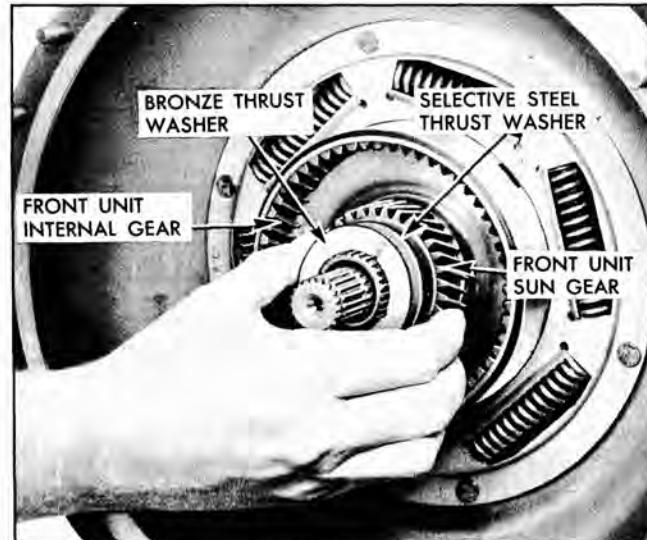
Removing Sun Gear to Torus Hub Thrust Washers
